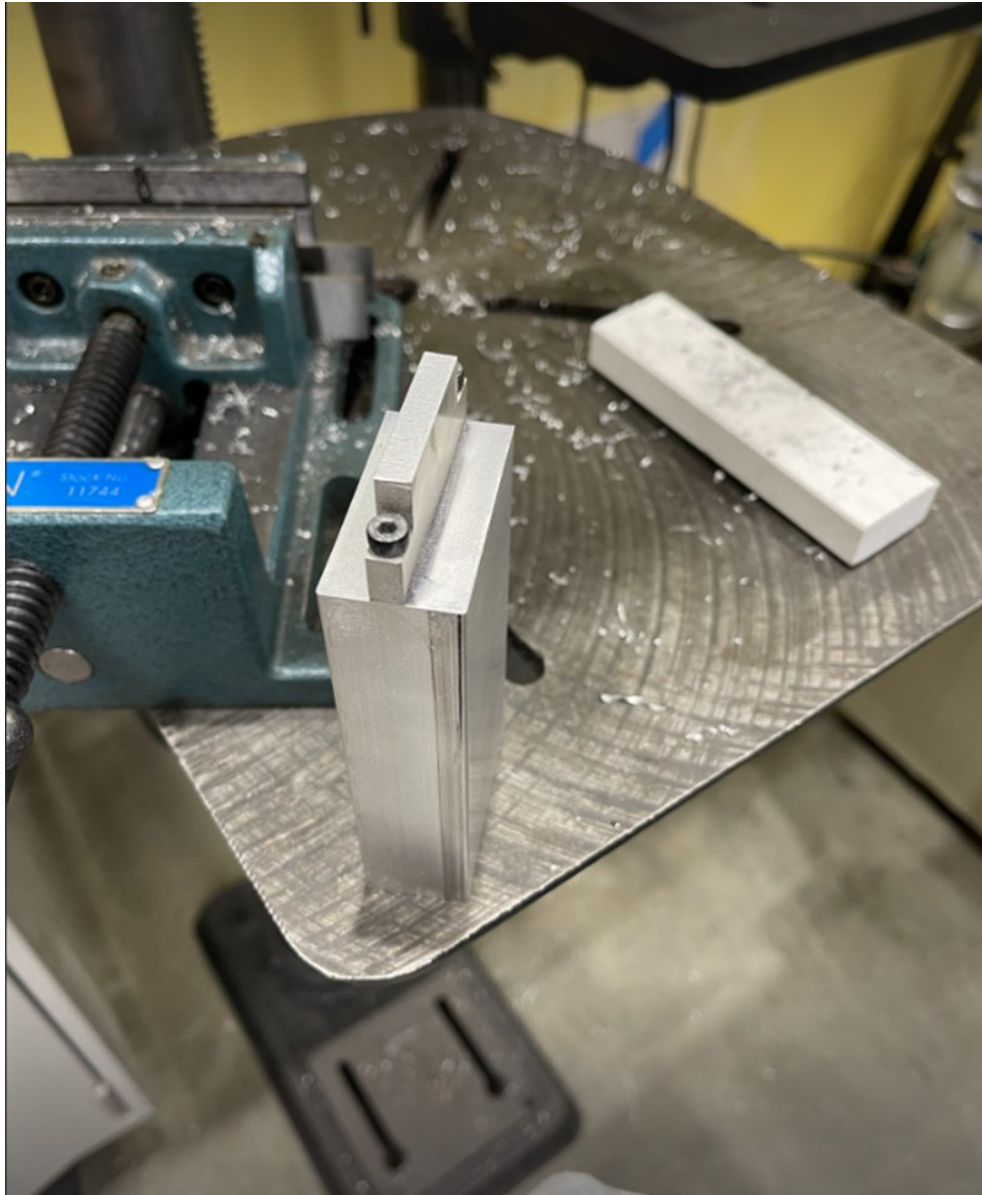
UMD Terrapinworks did this Machined piece to place the chip. The reason to machine this is to adjust the height in the experiment setup.
